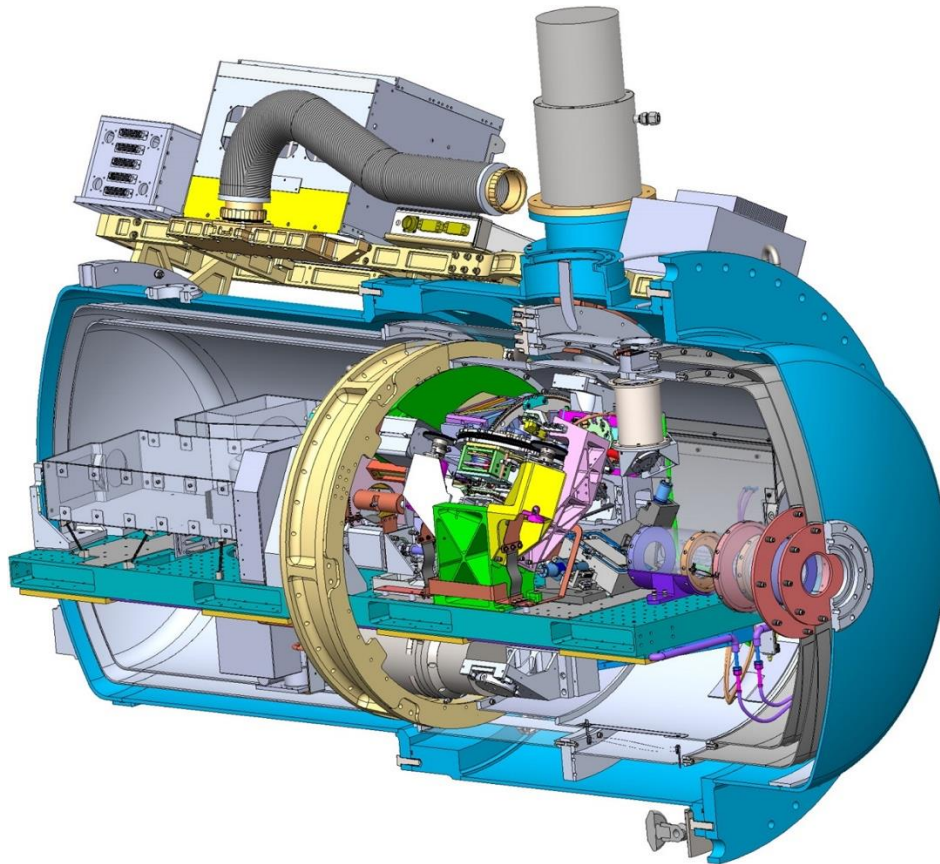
HAWC+ mounted to the telescope assembly (TA) (Harper, 2018).
